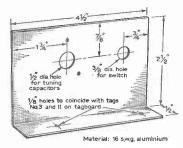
Details of the panel which carries the tuning capacitor and wave-change switch, and which is bolted to the component tag board.
